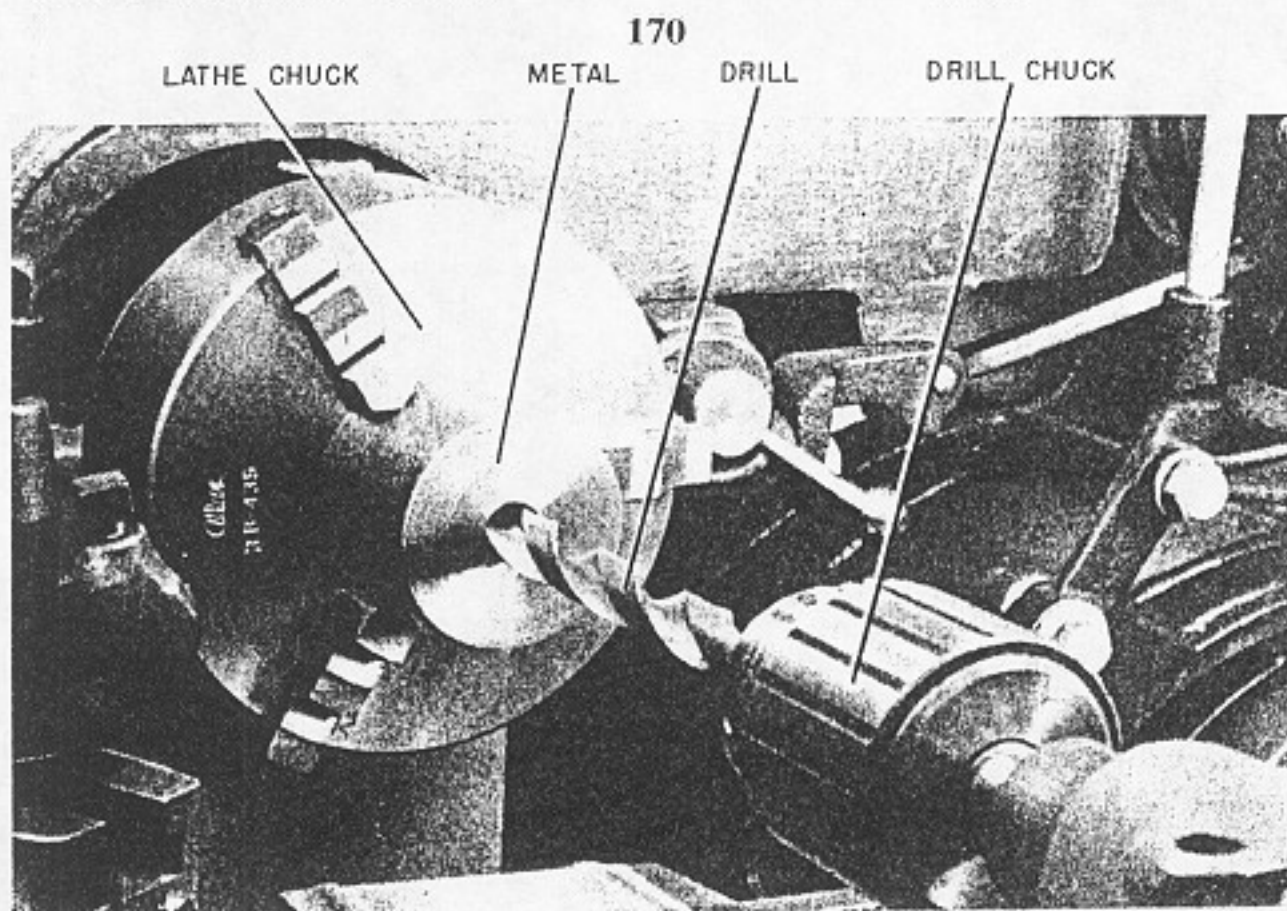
This method of drilling makes possible the drilling of a hole in the exact center of a round piece of metal.
